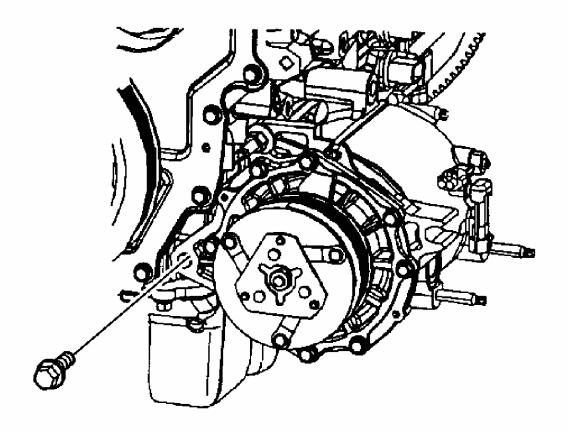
View of Air Conditioning Compressor Front Mounting Bolts Courtesy of GENERAL MOTORS CORP.
